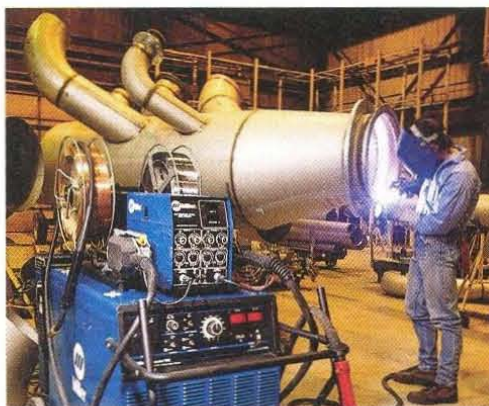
Heat tint is formed on stainless steel during welding but does not usually compromise the corrosion resistance of the stainless steel.
